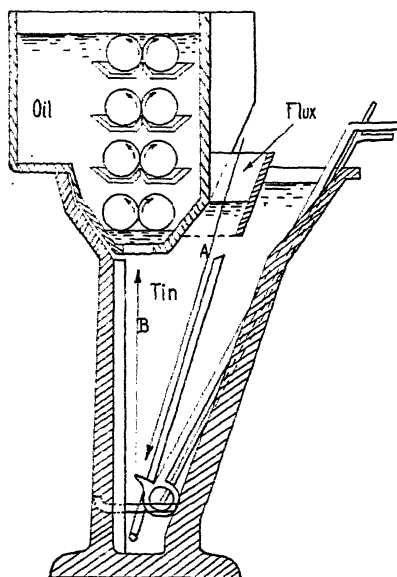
Early form of tinning machine [A 13]. The arrows indicate how the sheet is passed through the tin and oil baths. The pans beneath the exit rolls contain molten tin to aid in forming uniform and heavy coatings.
